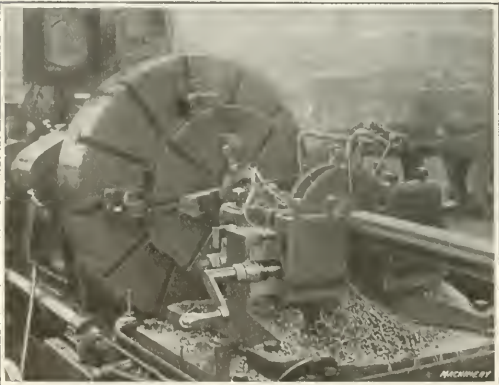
Turning Long Bars from which Billets for High-explosive Shells are subsequently cut
